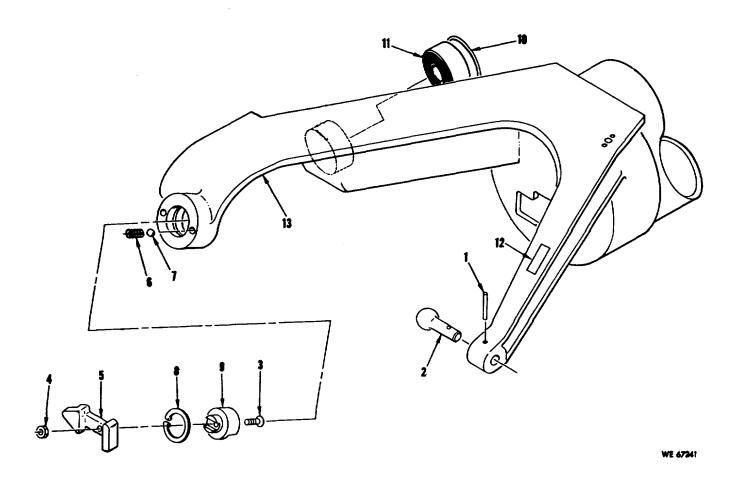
(Superseded) Tube Assembly-partially exploded view.
